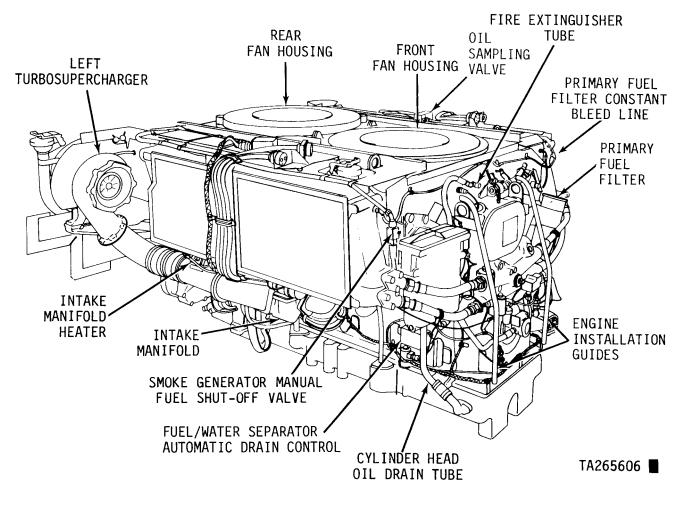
AVDS-1790-2D engine assembly - left front view.
